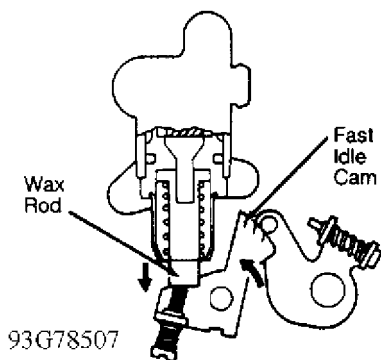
Checking Fast Idle Cam Separation (RX7)
